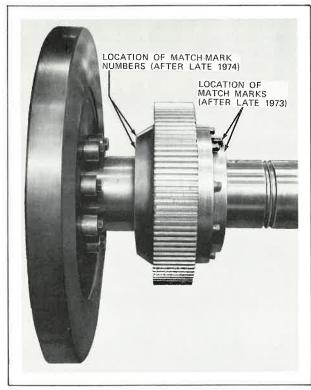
SIDE VIEW OF PUMP DRIVE GEAR ASSEMBLY.
